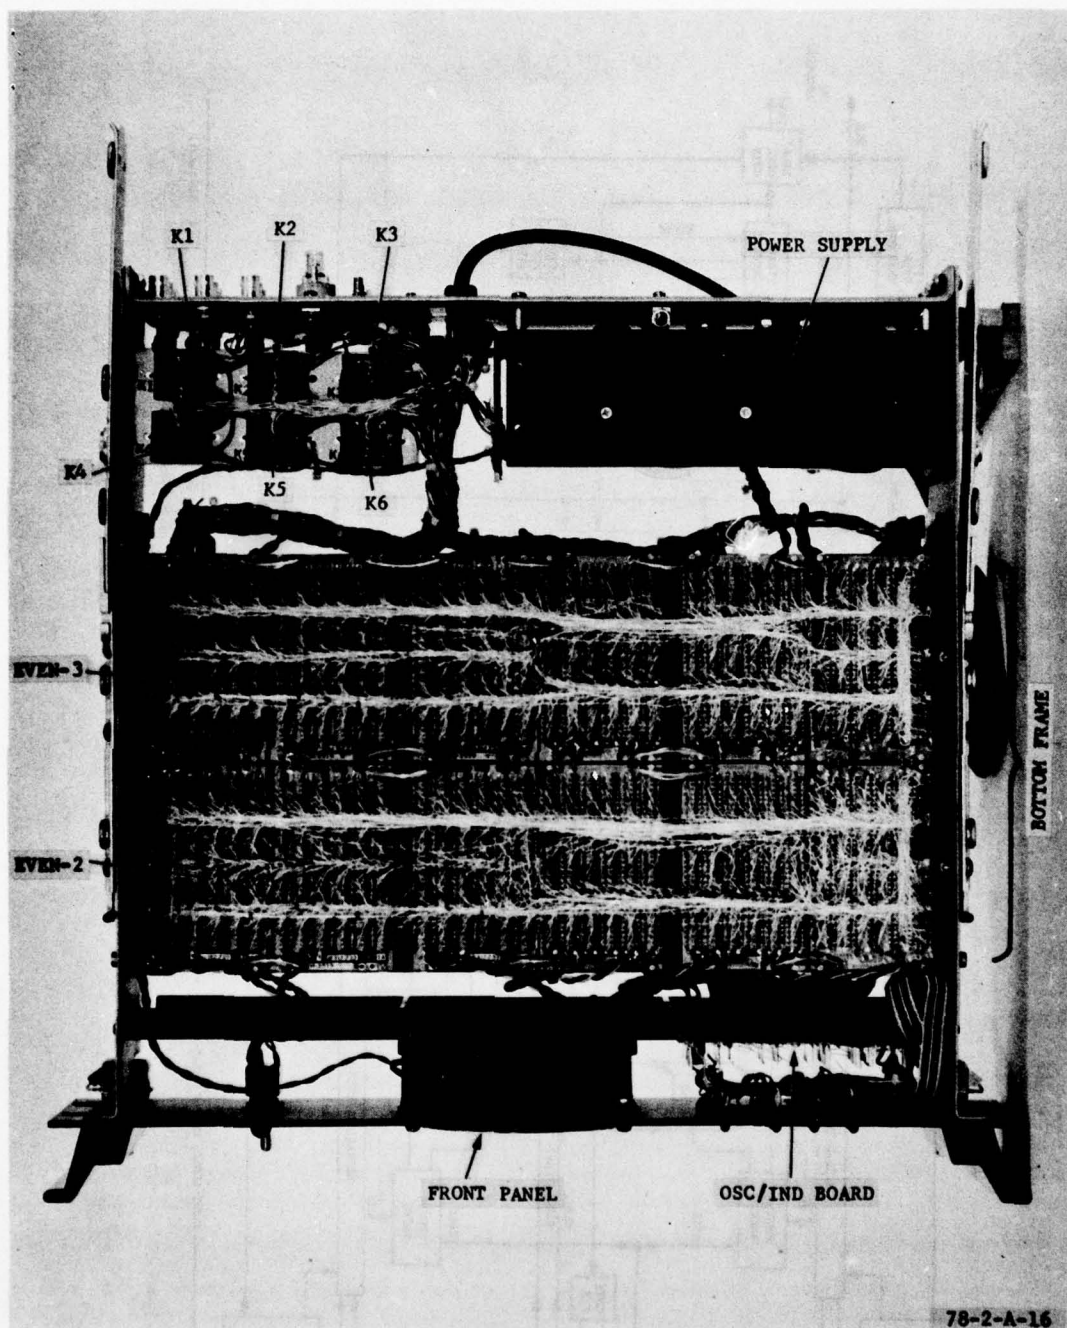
SIX-RADAR DACOMP, BOTTOM VIEW WITH BOTTOM LEVEL CLOSED
